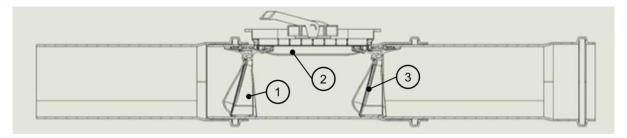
Backwater valve kit (1-ring-casting with flapper, 2-small flat fixing part, 3- sealing rubber)
